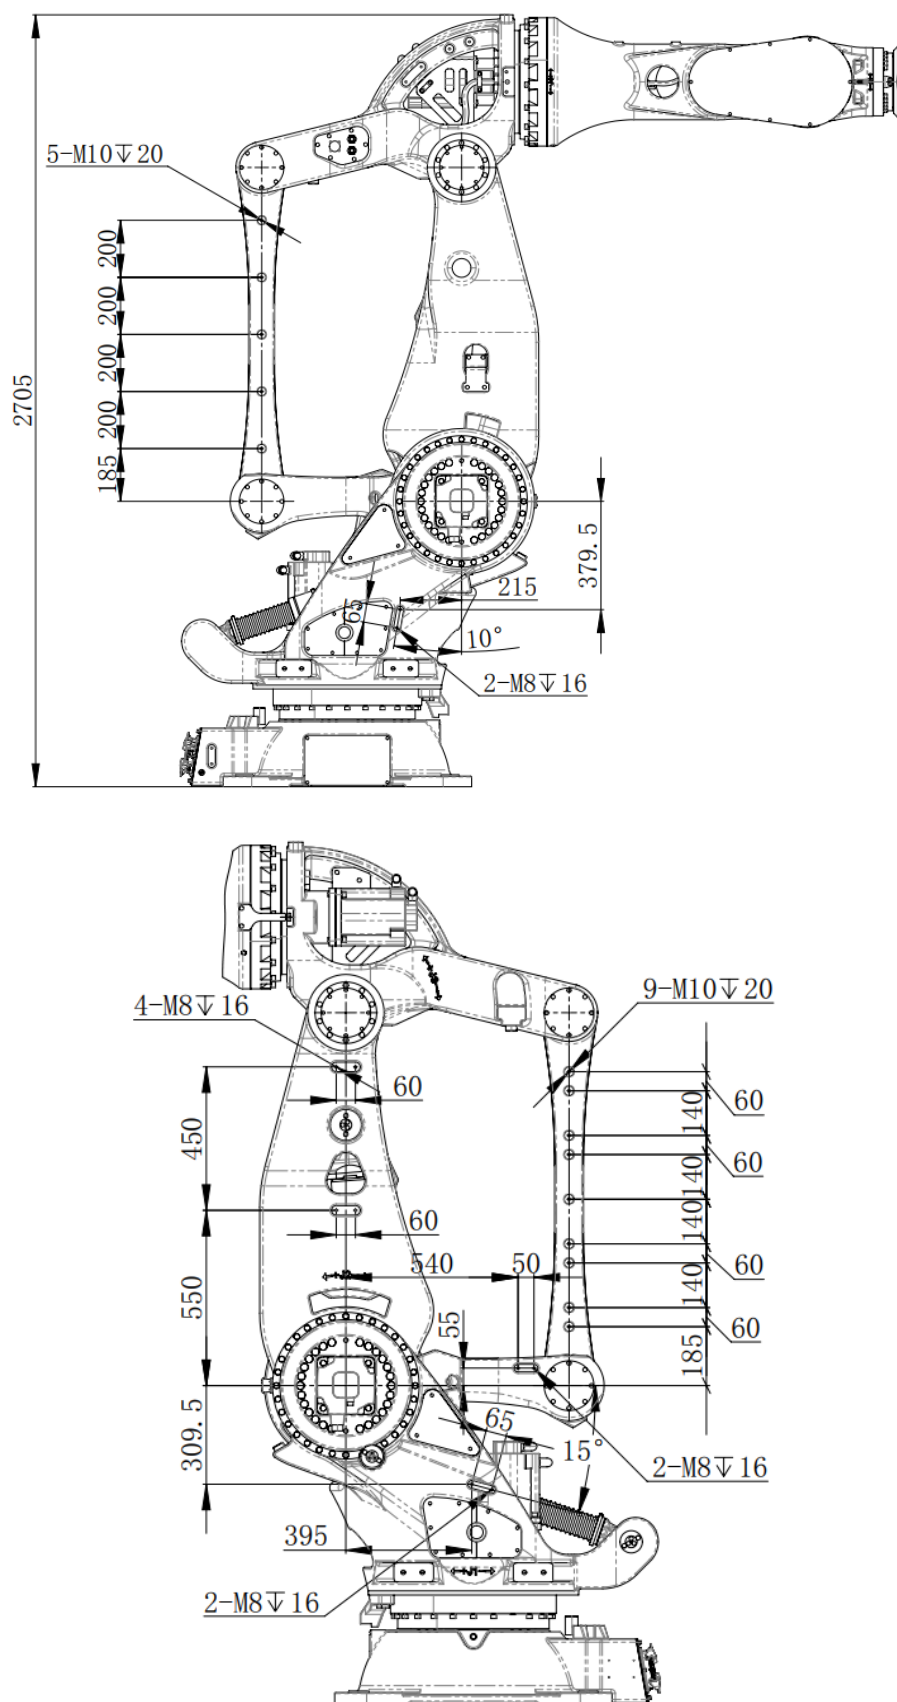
Equipment mounting face (ER350-3300, ER500-2800)
